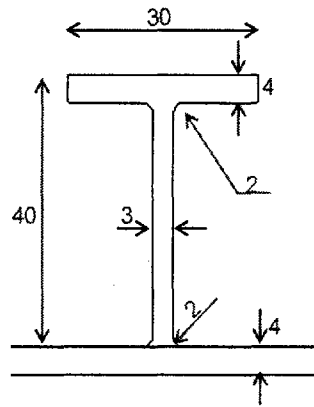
T-type stiffener geometry used for the tests on extruded panels (dimensions in mm)
